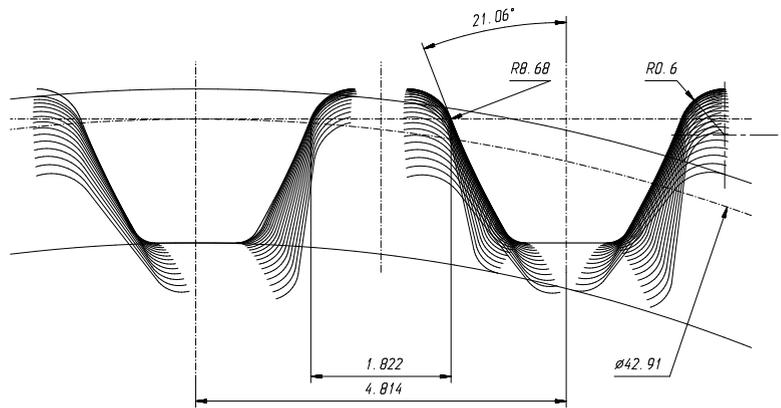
Reference profile of generating tool for a T5 28-tooth pulley.
